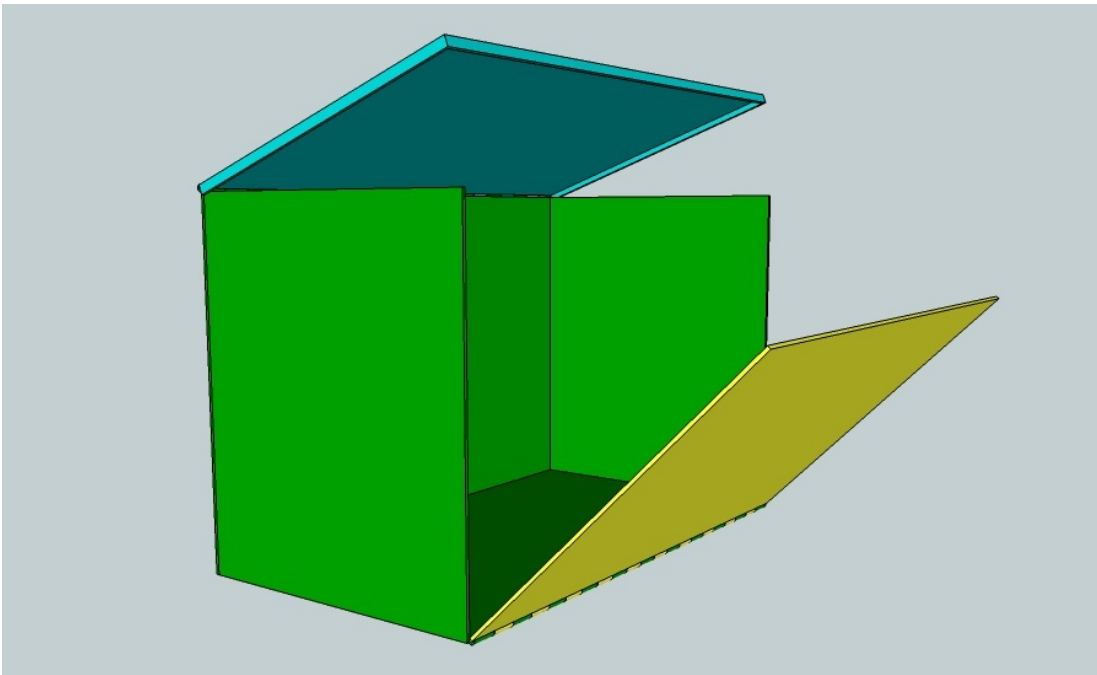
The FSW Tote Lid Folding Back and Side Wall Folding Down
